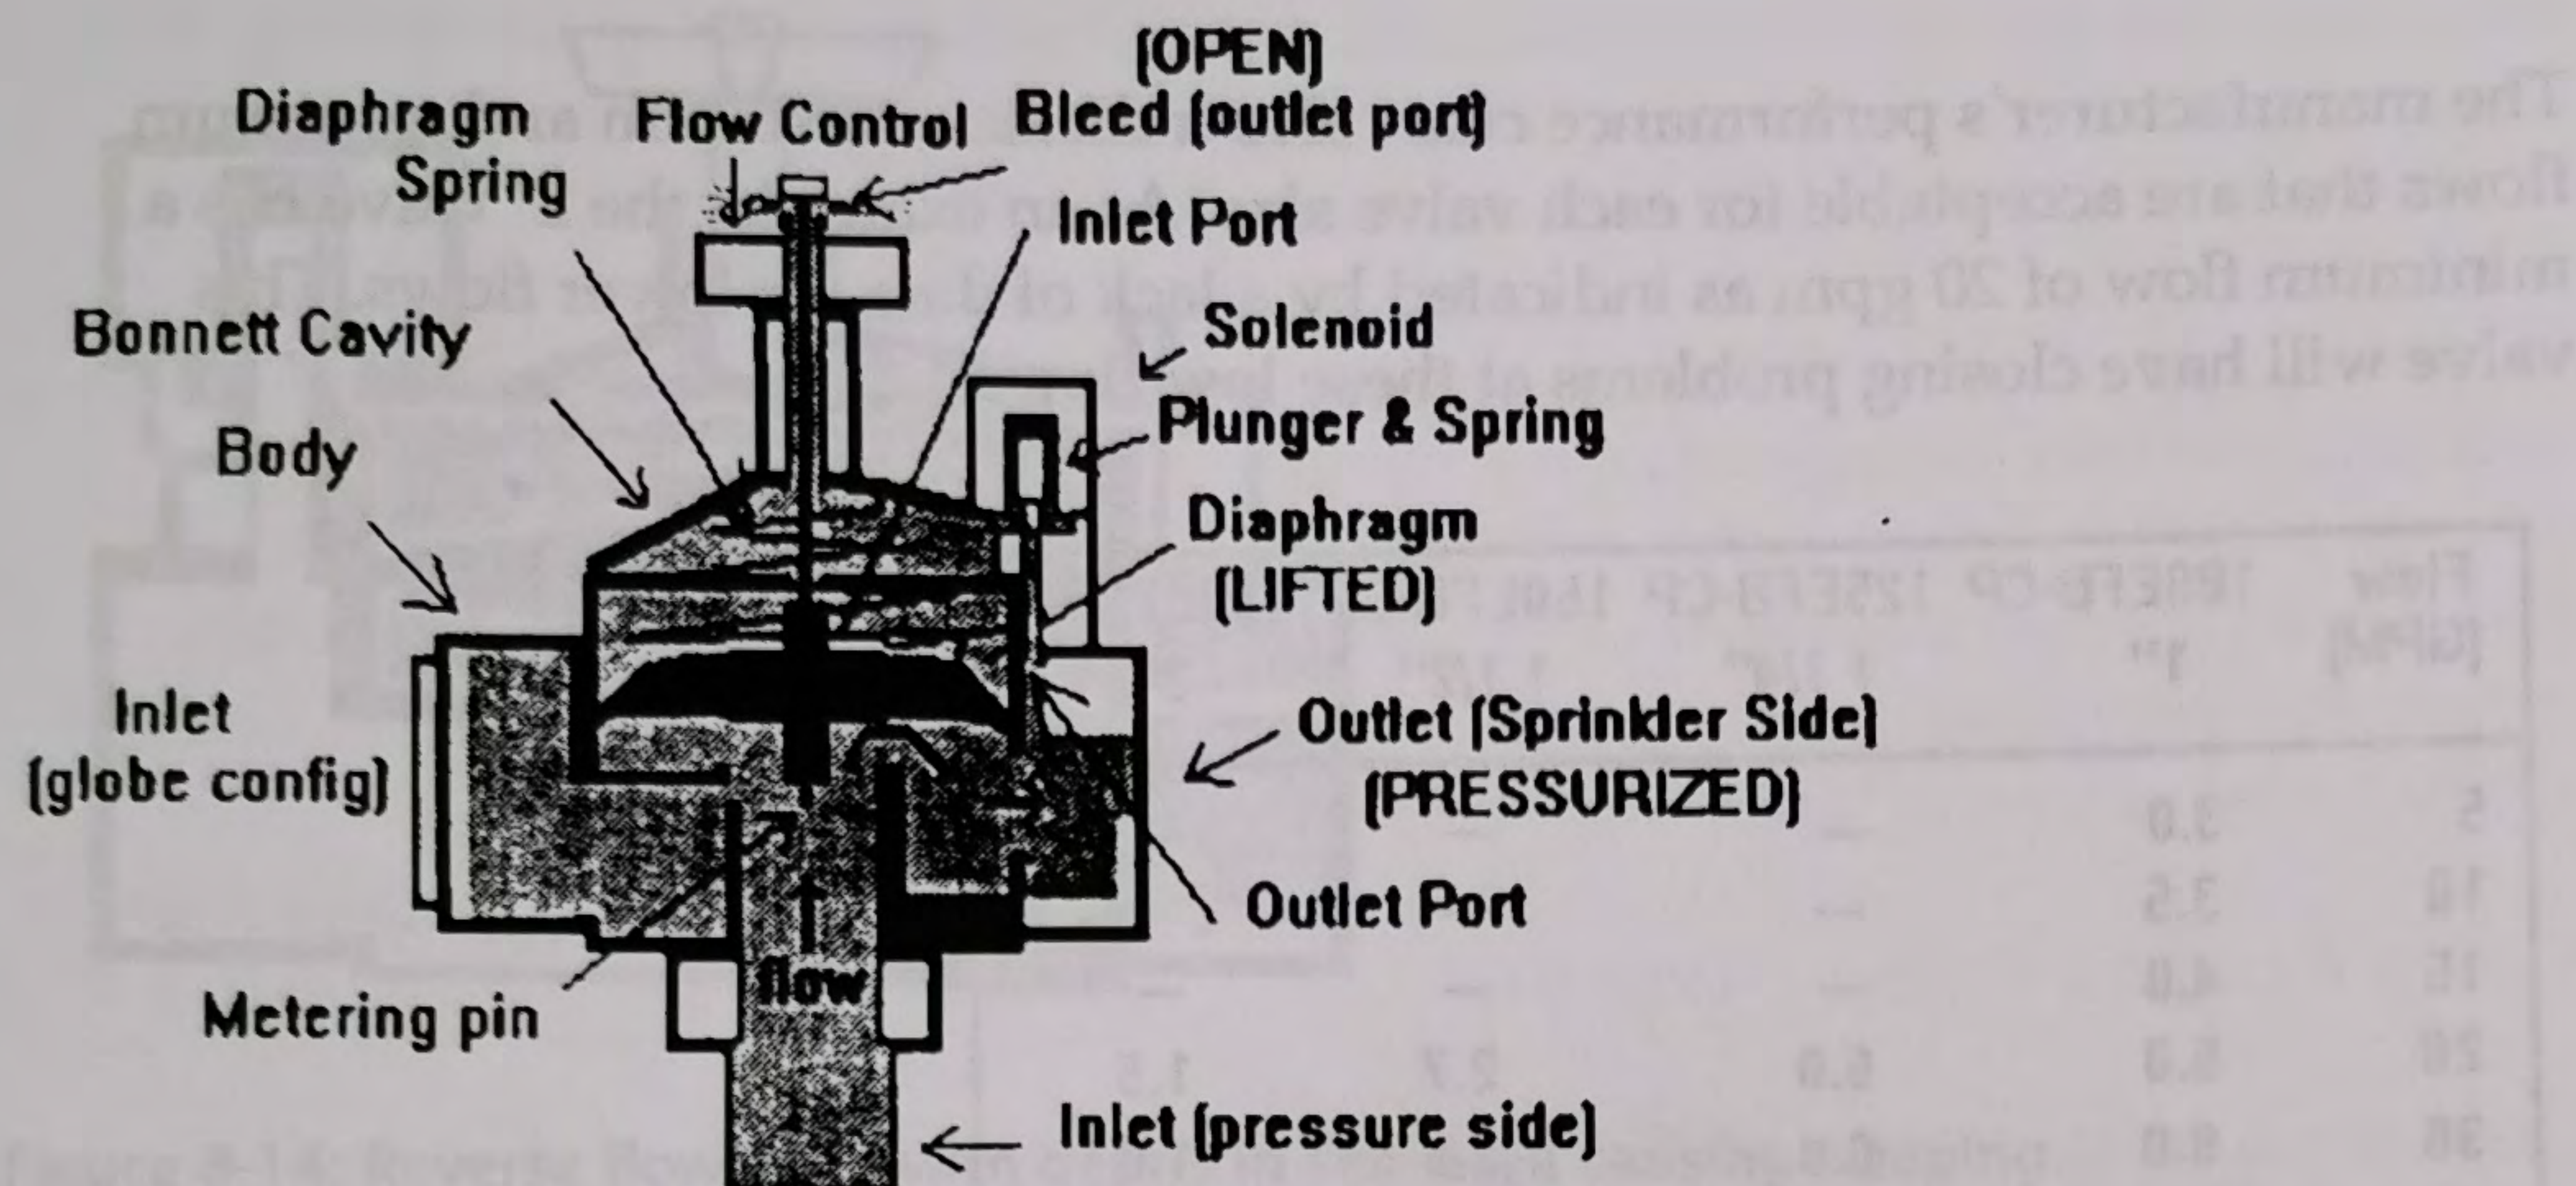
Reverse Flow valve that will not close due to plugged inlet port
